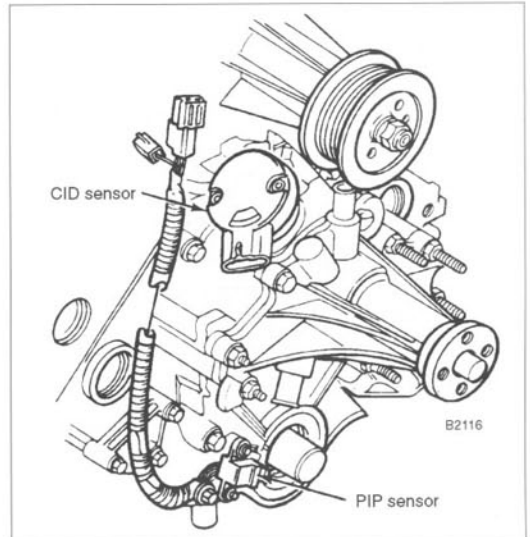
3.8L SC V-6 engine drives PIP Sensor directly off crankshaft. CID (Cylinder Identification sensor) is driven by camshaft through bevel gears in distributor location. On 3.0 and 3.2 SHO engines, CID is driven directly off of rear camshaft.
